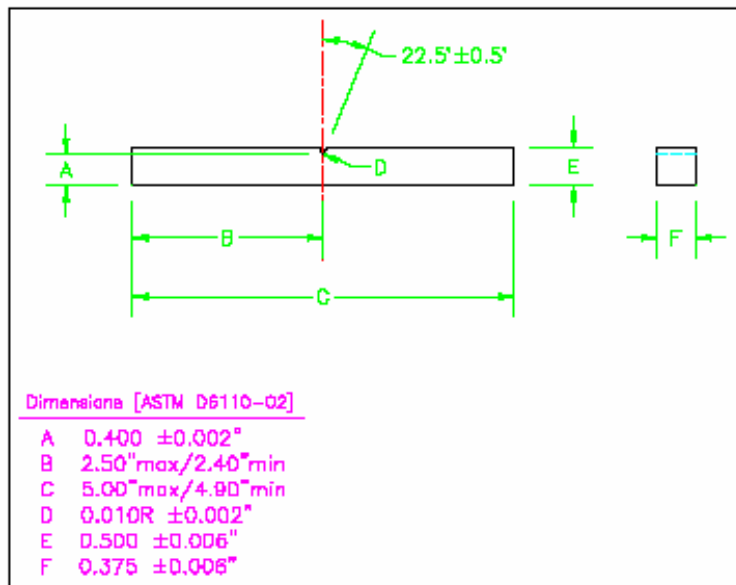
Charpy impact specimen dimensions according to ASTM standard D 6110-02 [148].
